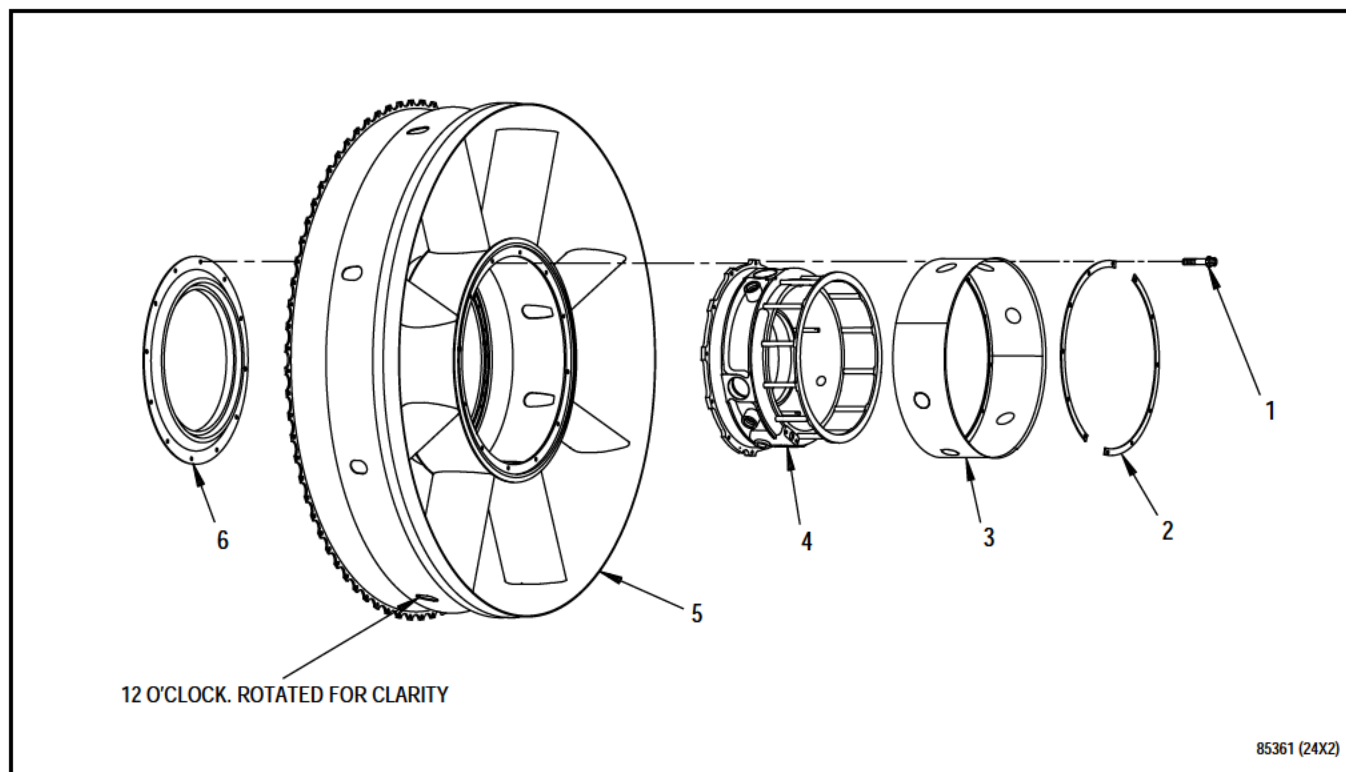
Fourth Stage Turbine Air Sealing Ring Assembly and No. 5 Bearing Seal Assembly - Installation
